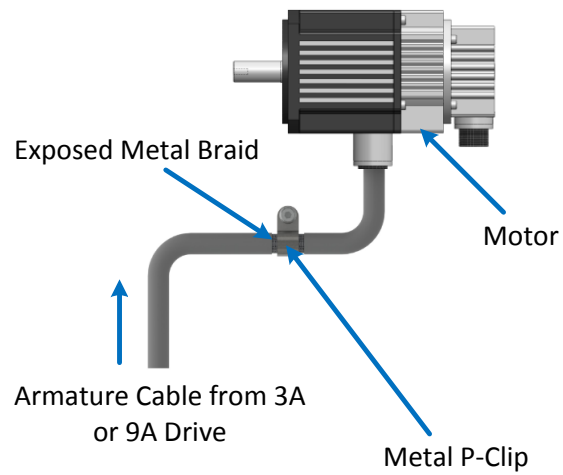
Armature Cable Shield Termination with metal P-Clip at Motor End
